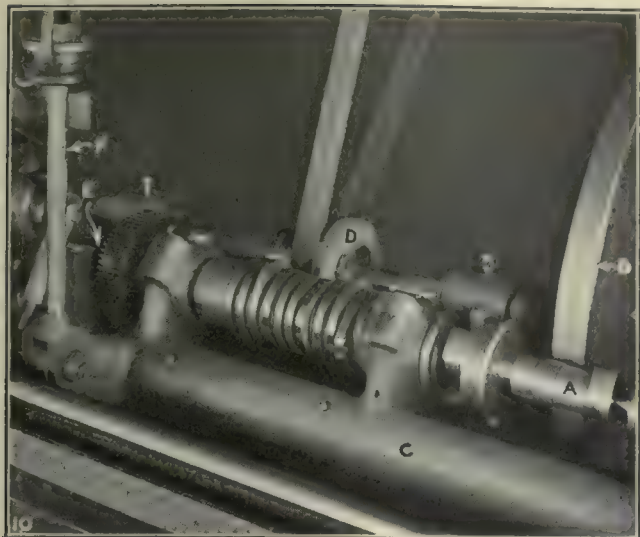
GRINDING MASTER CAMS. FIG. 11—GRINDING A SINGLE MASTER CAM
